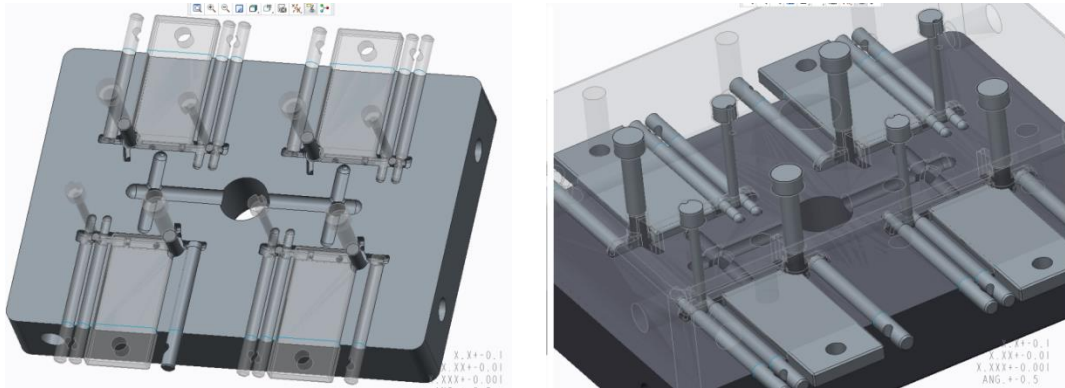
The three-dimensional solid models of the die mold parts in assembly.
